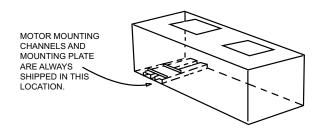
LA300 AN LB360/LB480 FACTORY MOTOR MOUNTING POSITION
